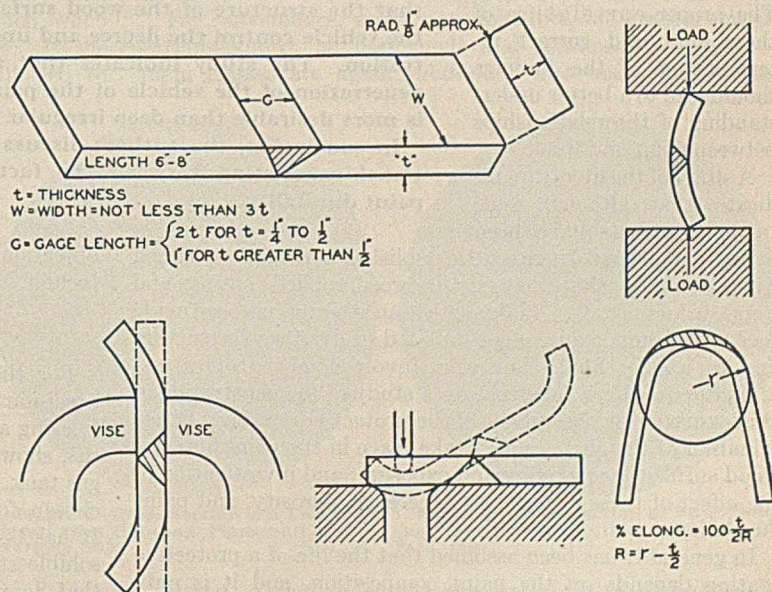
Making Bend Test to Determine Ductility of Welded Joints
